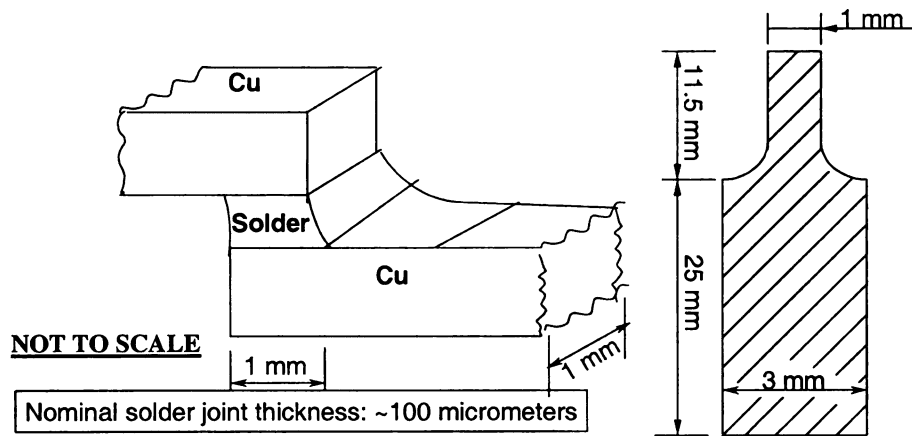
Schematic of typical single shear lap solder joint dimensions.
